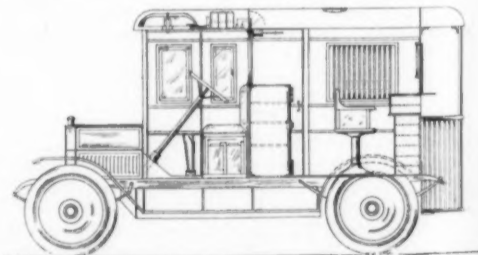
SECTIONAL VIEW OF ARMORED MOTOR CAR
